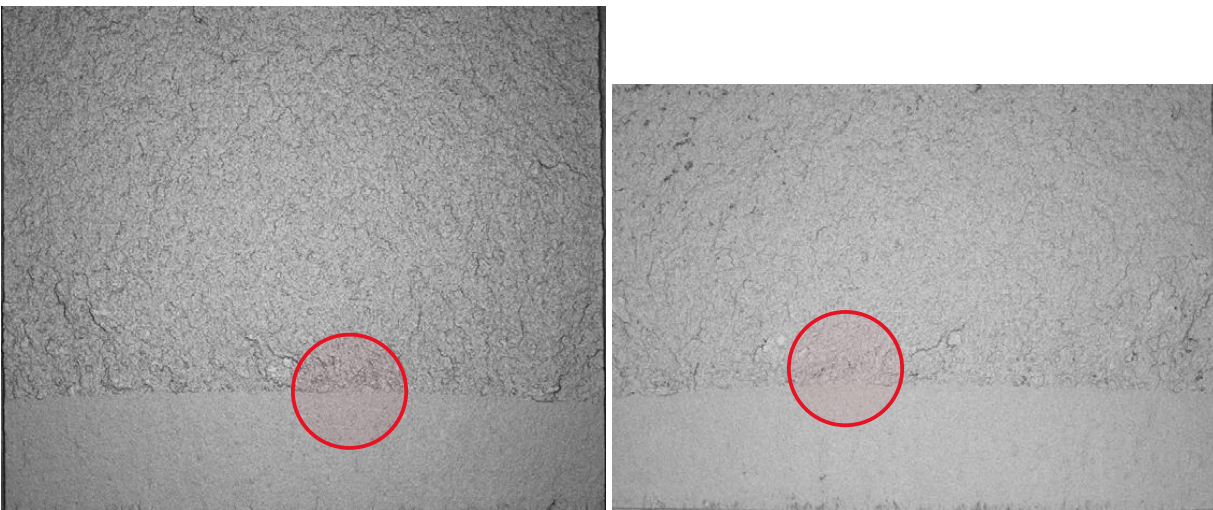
Left and right fracture surface of unirradiated 25 mm C(T) specimen B1C.3, showing predominantly cleavage fracture. The primary cleavage fracture initiation region is marked by a red circle. The test temperature was -70°C and the fracture toughness 49.3 MPa \sqrt{m} which explains the flatness of the fracture surface. Cleavage initiation occurs in a region without special features, but there are isolated Al_2O_3
